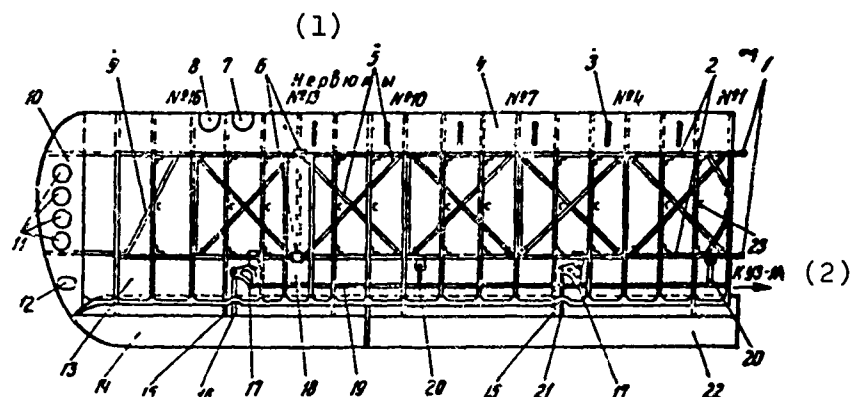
Diagram of the framework of the left detachable part of the lower wing: 1 - attachment points of lower wing to the wing center section; 2 - wing spars; 3 - deformation cutouts in the covering of the wing leading edge; 4 - covering of the wing leading edge; 5 - intrawing wire strips; 6 - attachment points of biplane strut; 7 - landing light; 8 - taxiing light; 9 - duralumin wire strip; 10 - wing tip; 11 - opening for lightening; 12 - opening for assembly and disassembly of the rigid flap control rods; 13 - duralumin covering of wing trailing edge; 14 - end flap; 15 - mounting brackets of flaps to the wing; 16 - end flap control rod; 17 - three-arm actuator; 18 - duralumin support plate; 19 - flap control rod; 20 - transmitting flap control actuating arm; 21 - single-arm flap-control lever; 22 - root flap; 23 - strut of standard rib.
